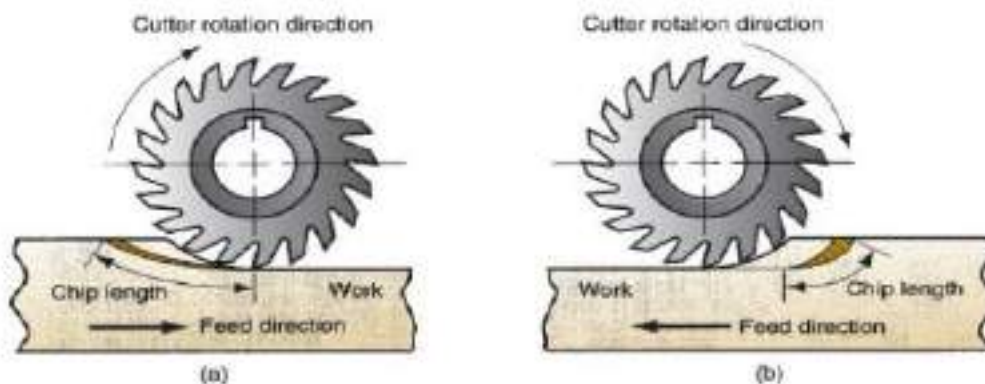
Two forms of peripheral milling operation with 20 tooth cutter: a) up milling, b) down milling
